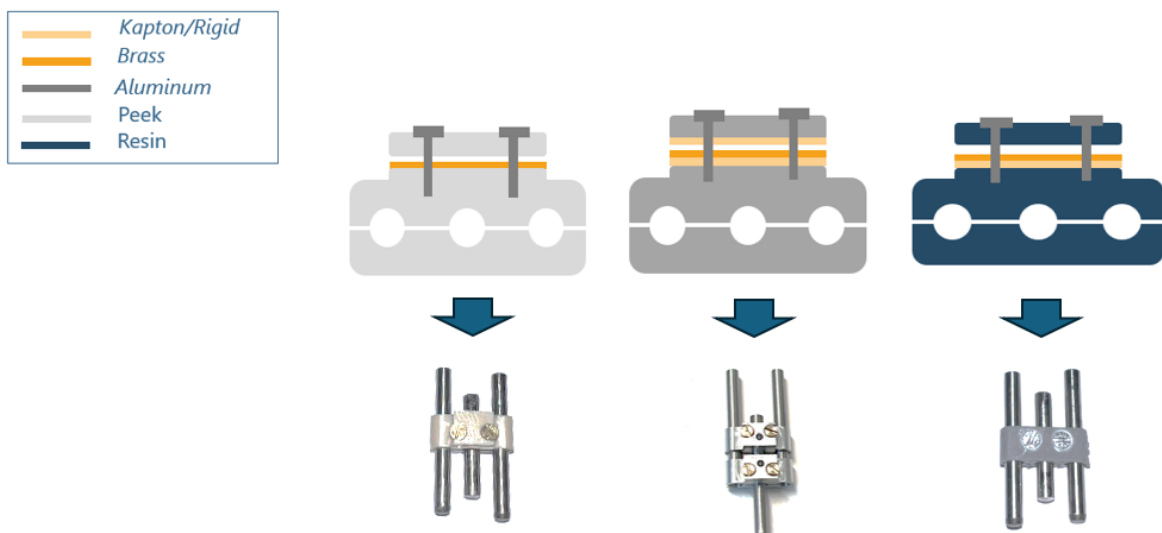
Evolution of the implant clamping concept from initial PEEK-based designs to the optimized aluminium clamp.
